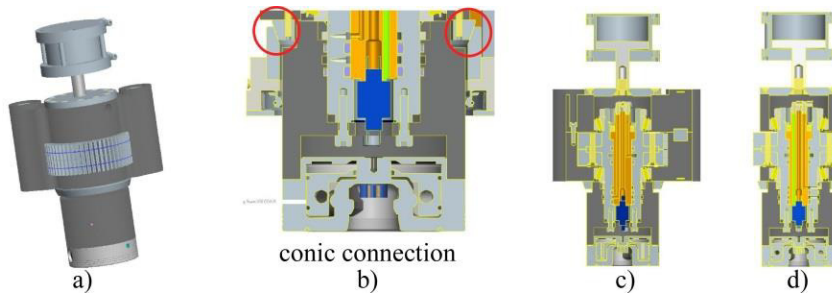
Foot-pin assembly detailed. a) complete assembly, b, c, d) different cross section views of the foot pin assembly.
